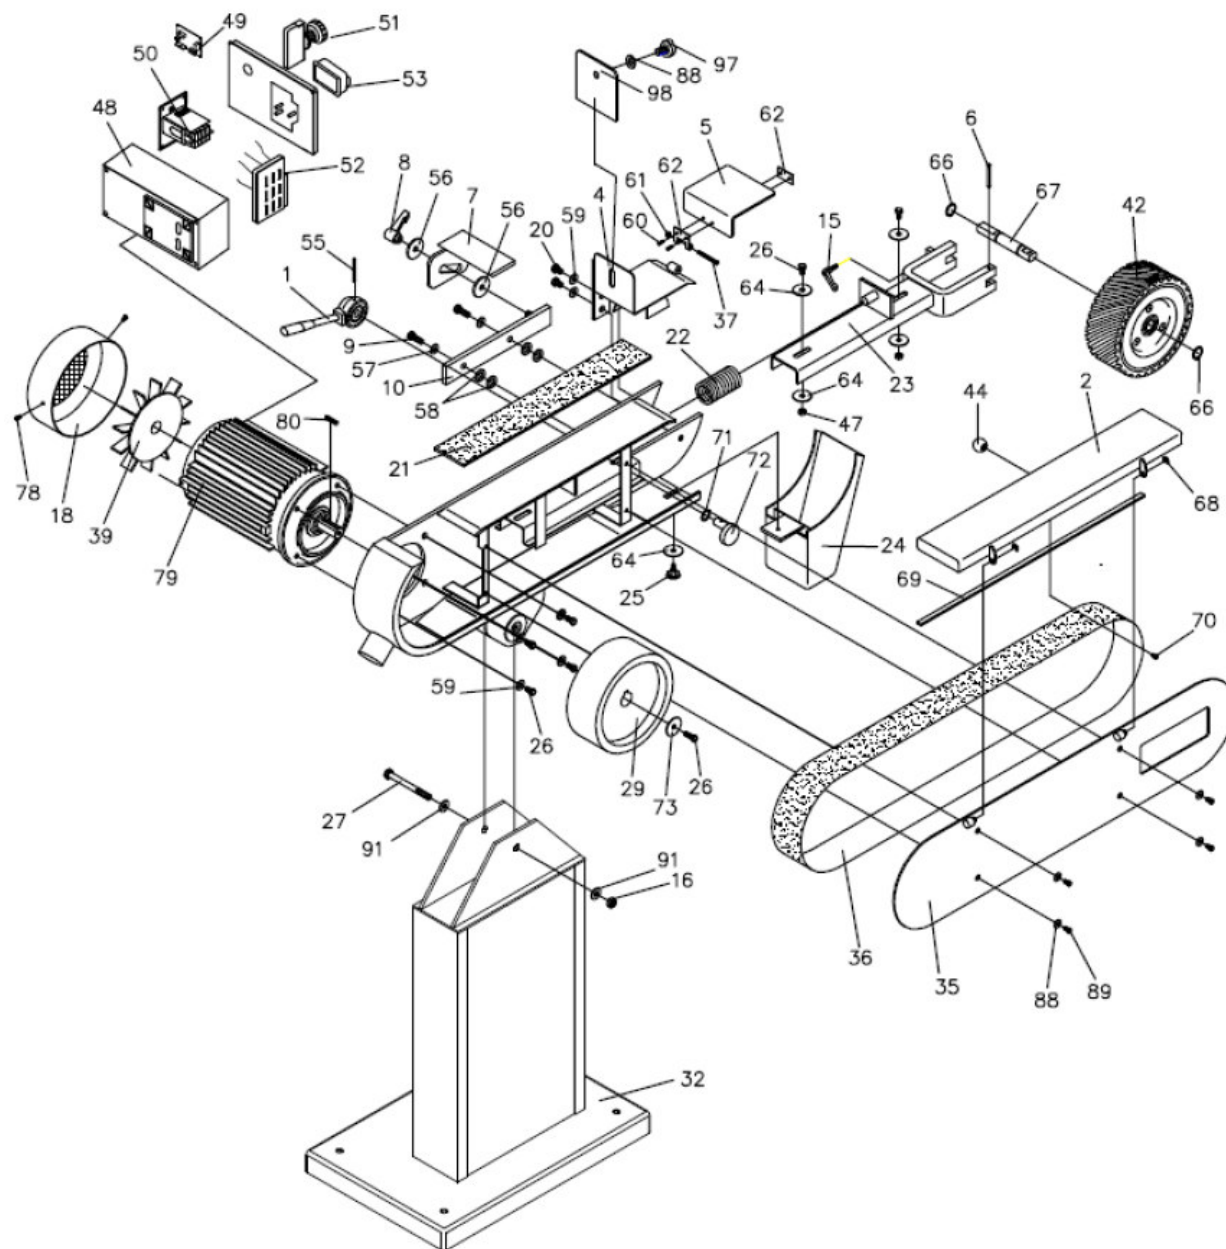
Spare part drawing of the model MBSM 75-20 and MBSM 150-20
